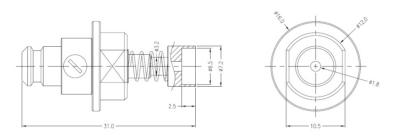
Juki KE2080L nozzle (metal). Dimension in mm.
